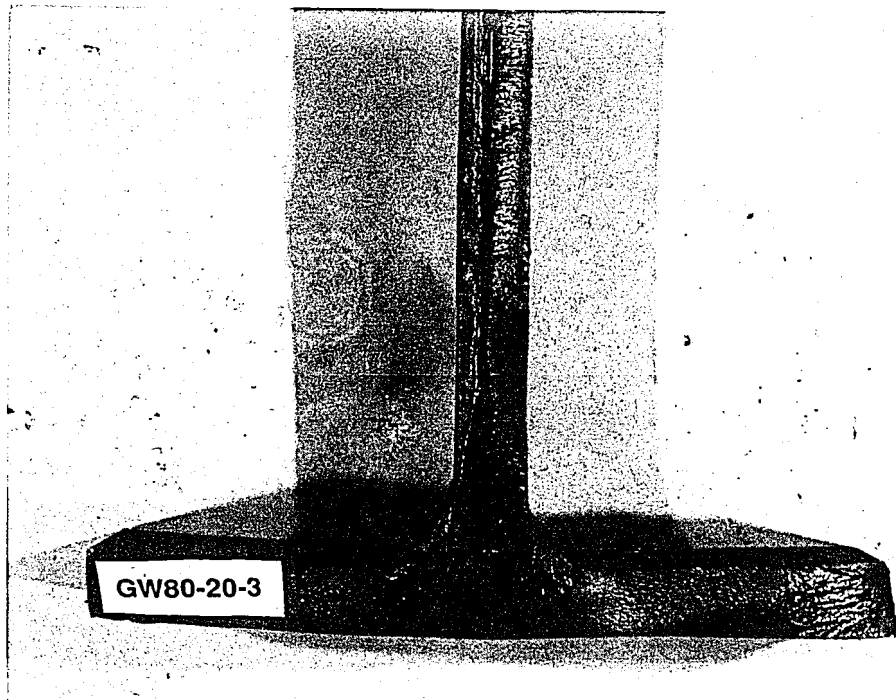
Typical Incomplete Penetration of Two-sided Groove Weld in 9.5mm Thick Web.
